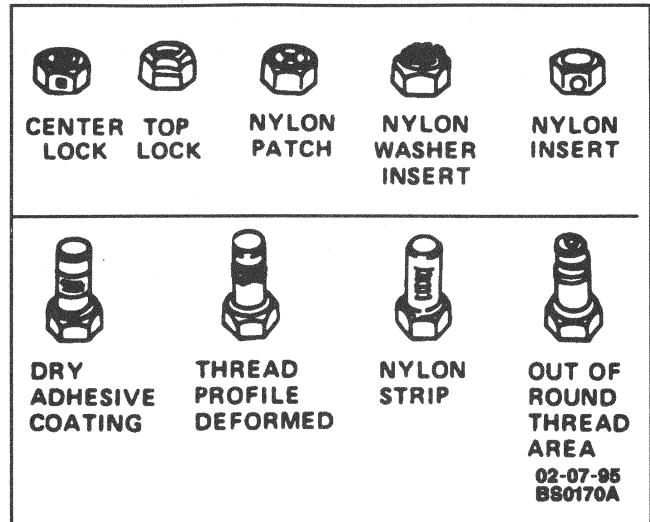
Prevailing Torque Nuts and Bolts/Screws
